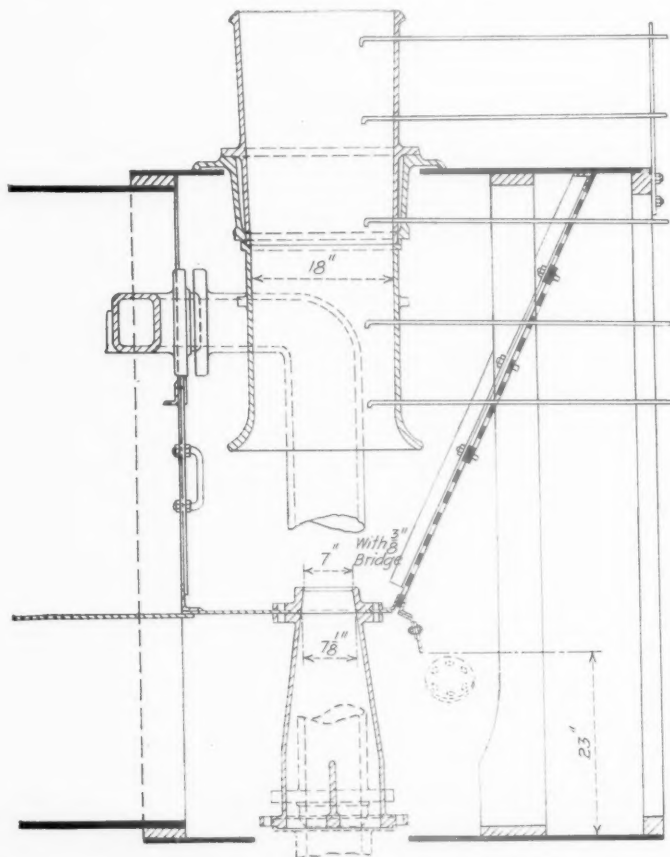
The Original Front End Arrangement of the N. & W. Mountain Type Locomotives
